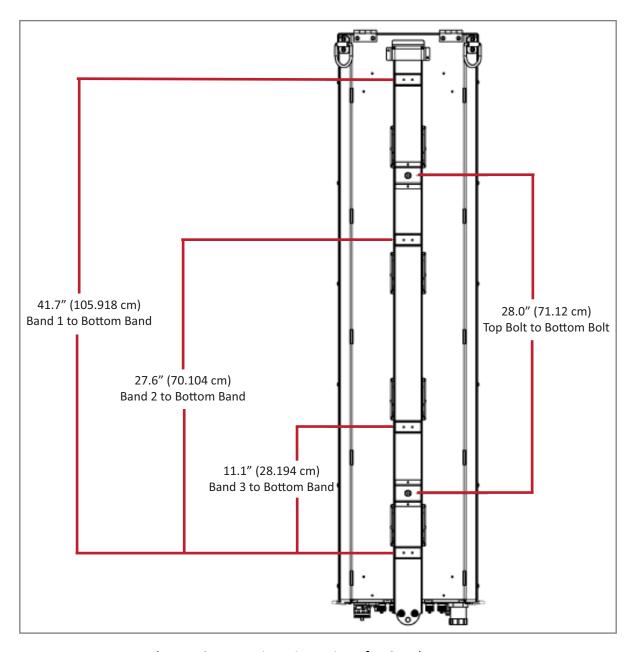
Mounting Dimensions for Quad-Bay PRUs
